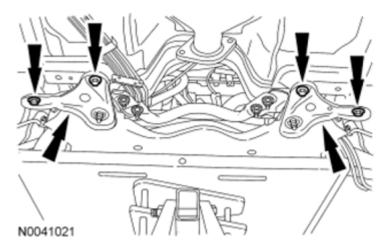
Locating Subframe Support Brackets Bolts Courtesy of FORD MOTOR CO.
